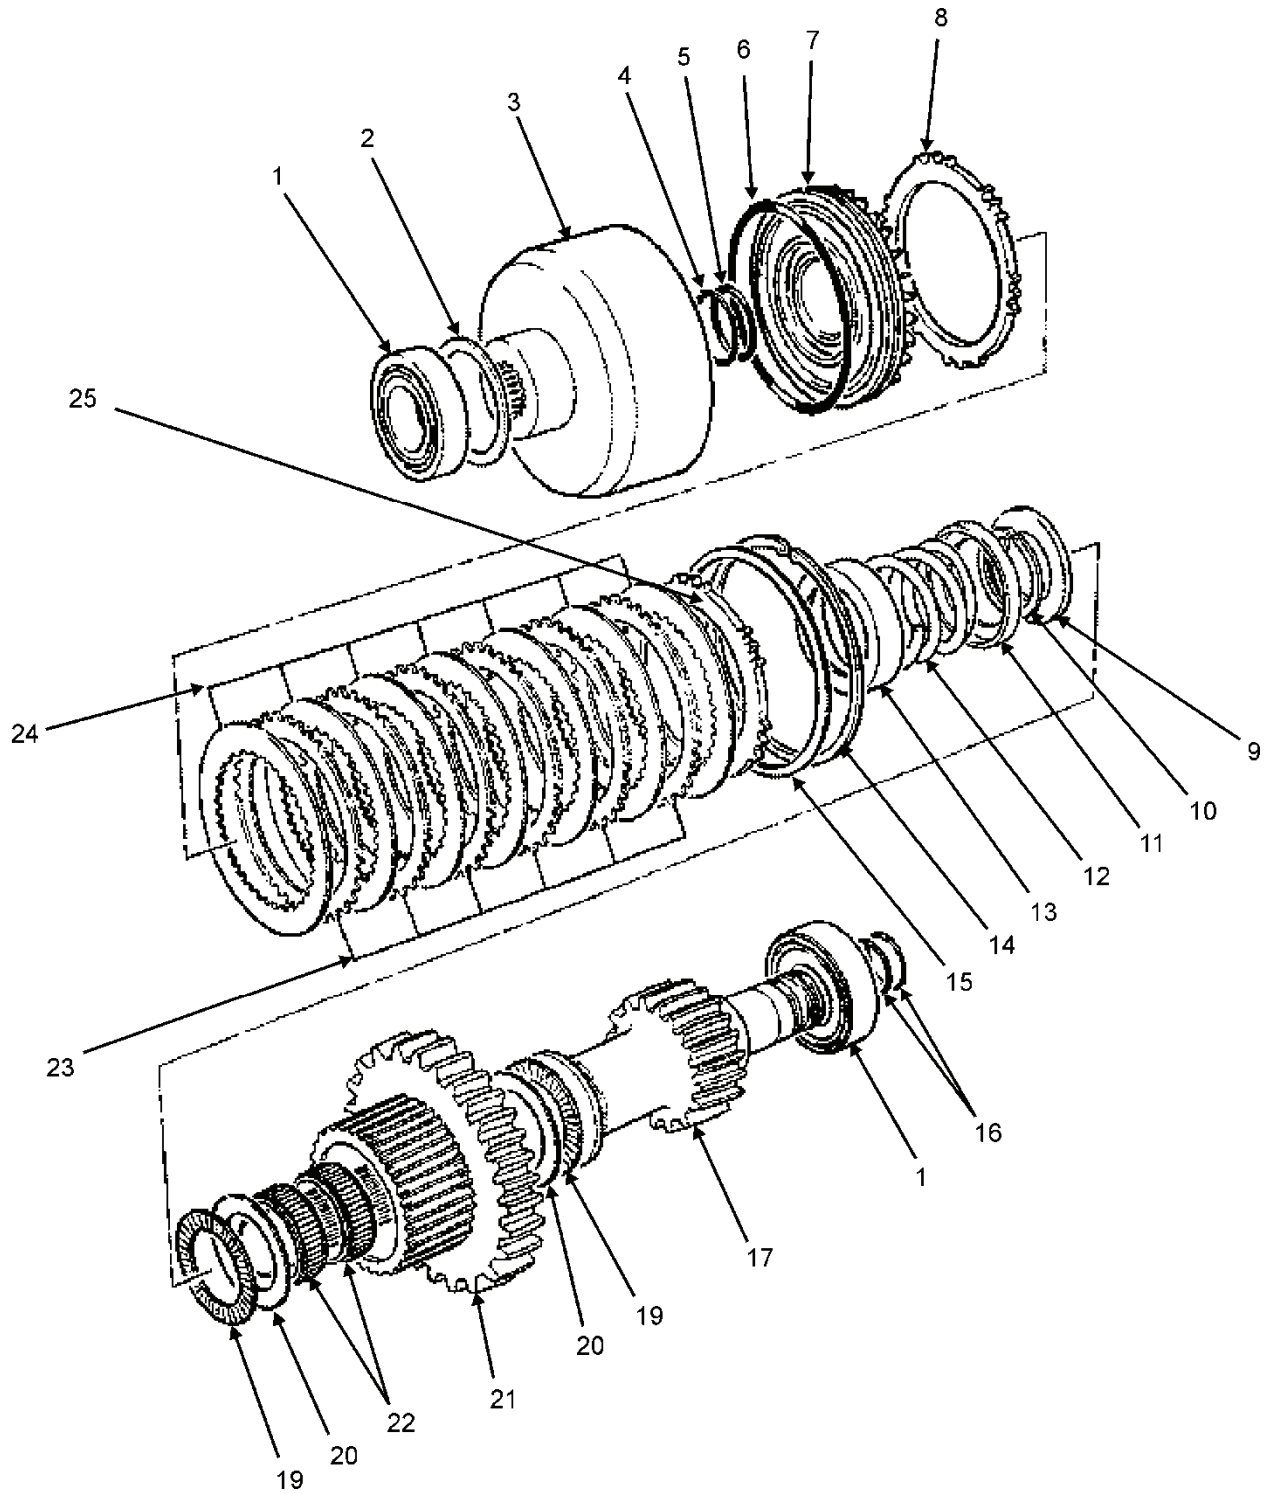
TRANSMISSION - LAYSHAFT CLUTCH
